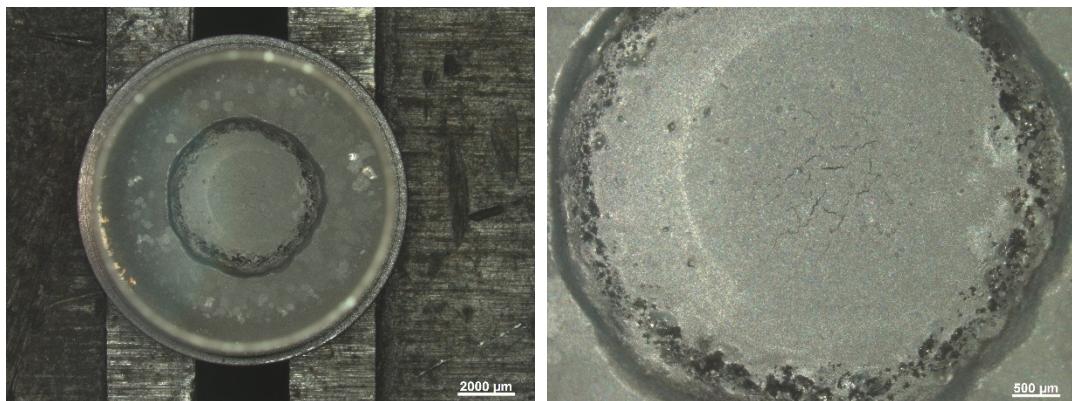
View of GTA spot weld made with 4047 filler plug looking down into chamber with stereo microscope, observed at two different magnifications.
